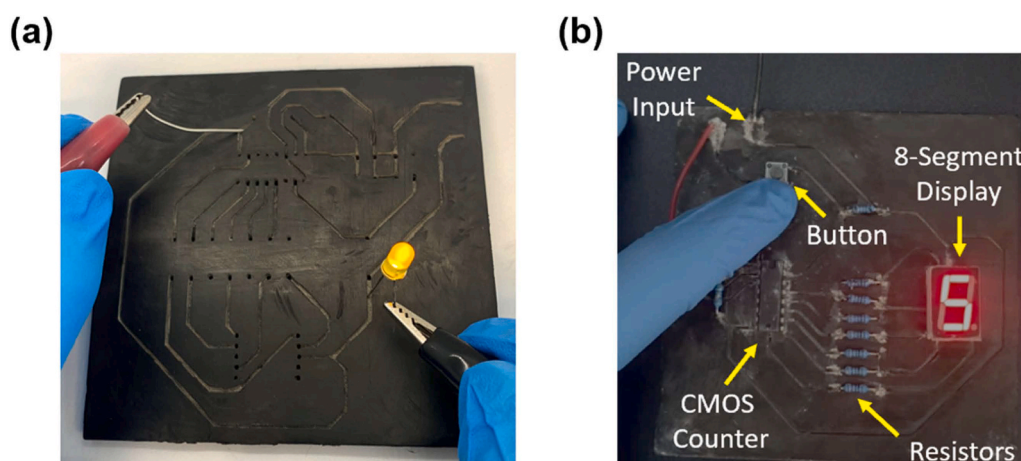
(a) Fabricated custom-designed electrodes embedded into the 3D-printed part; (b) Representative image of the LED display counter on the 3D-printed part.
